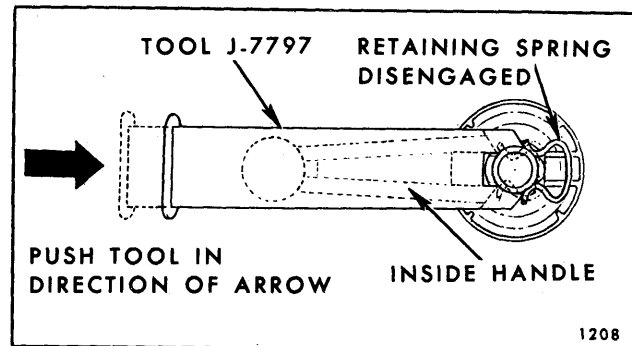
Door Inside Handle Removal - Spring Clip Retained
